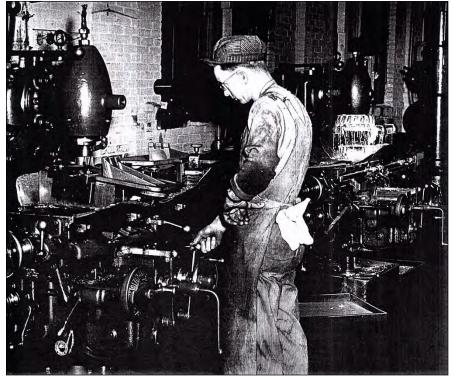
Overview in factory building, first floor, west sidewall, looking north, ca. 1944 (Courtesy of James M. Rocklin)
